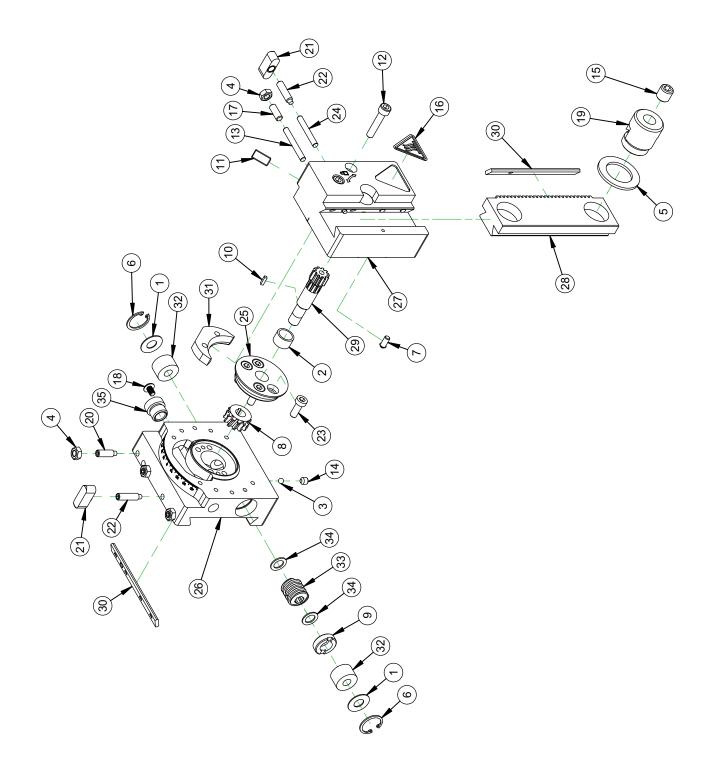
TOOL HOLDER ASSEMBLY (P/N 89940)
